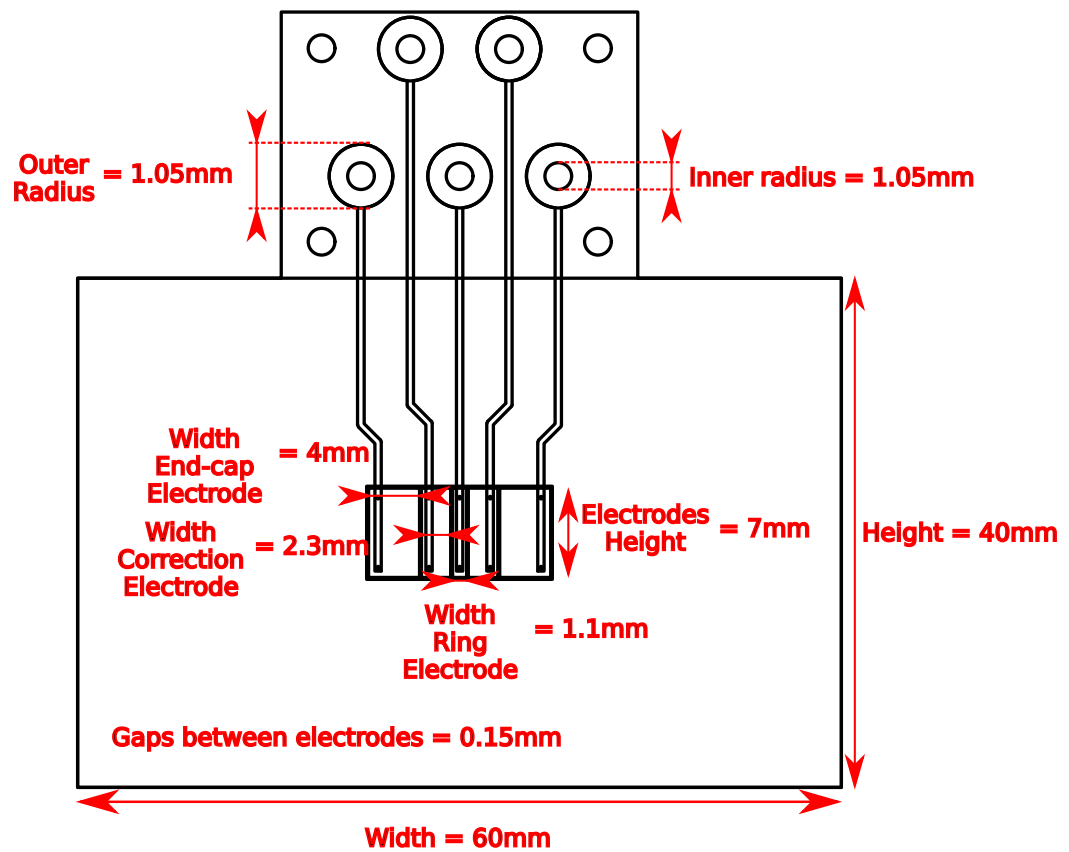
CAD and dimensions of the P.W.Circuits chip.
